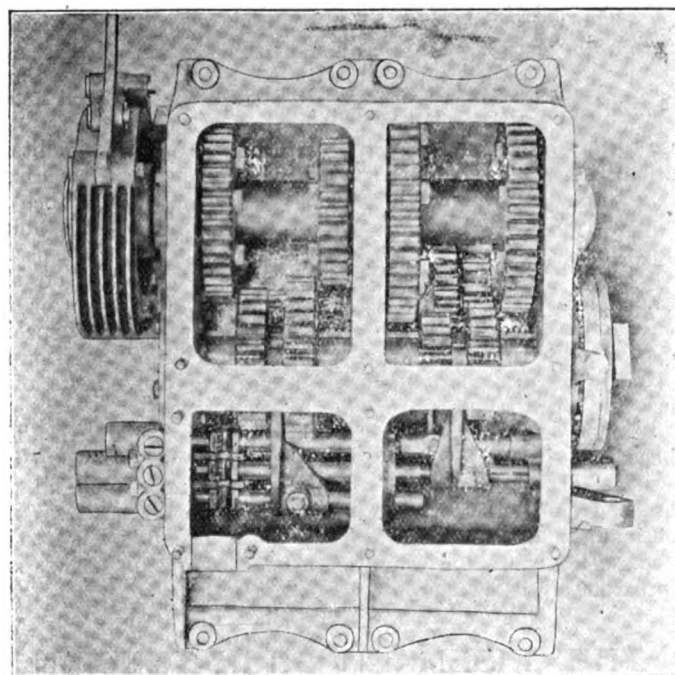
View of Gear Box with Cover removed. The water-cooled Foot Brake is also seen at the left.
